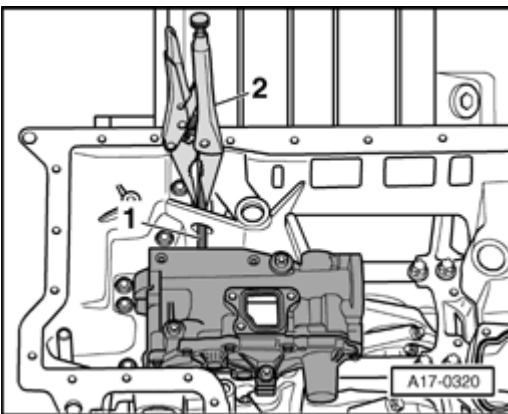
Unlocking Gripping Pliers And Letting Drive Shaft Glide Into Oil Pump
